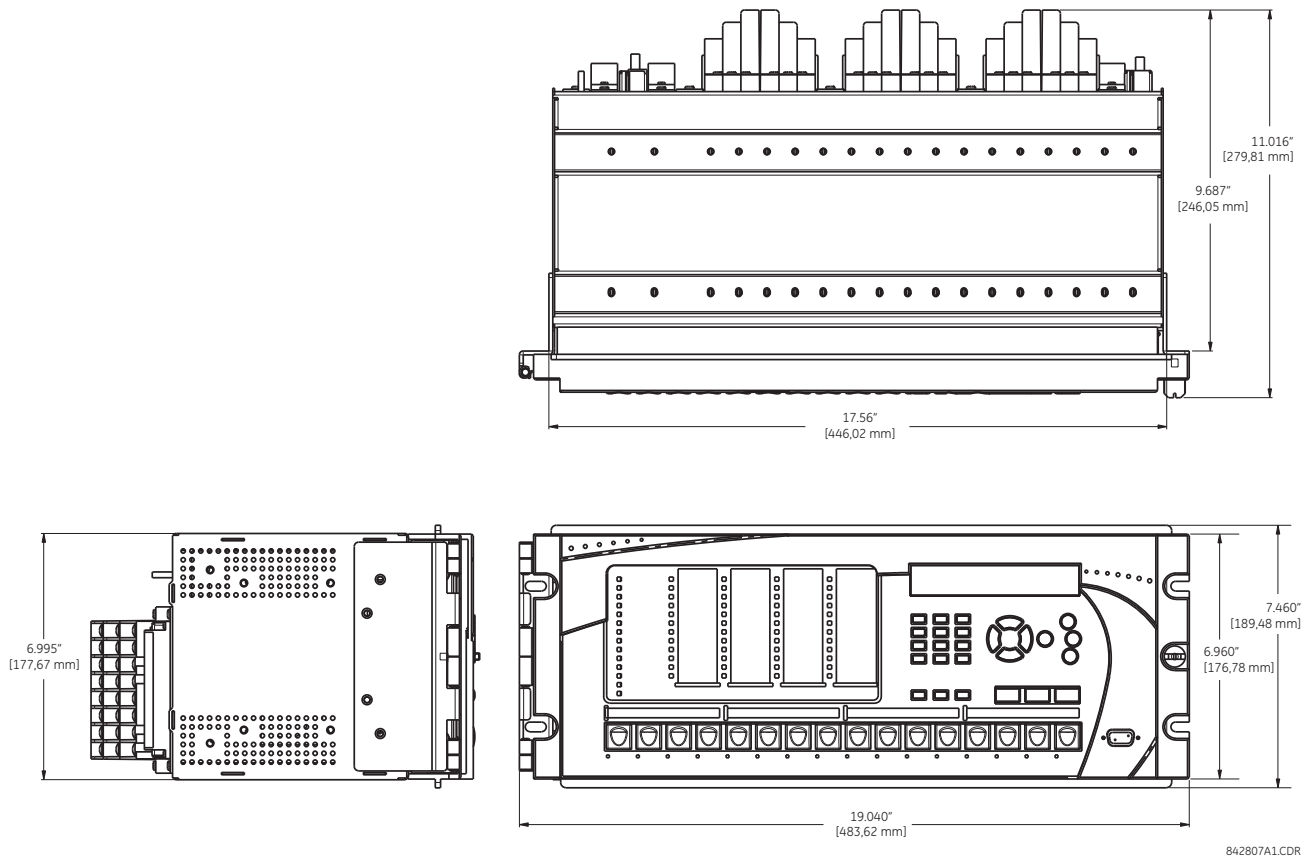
C70 HORIZONTAL DIMENSIONS (ENHANCED PANEL)
